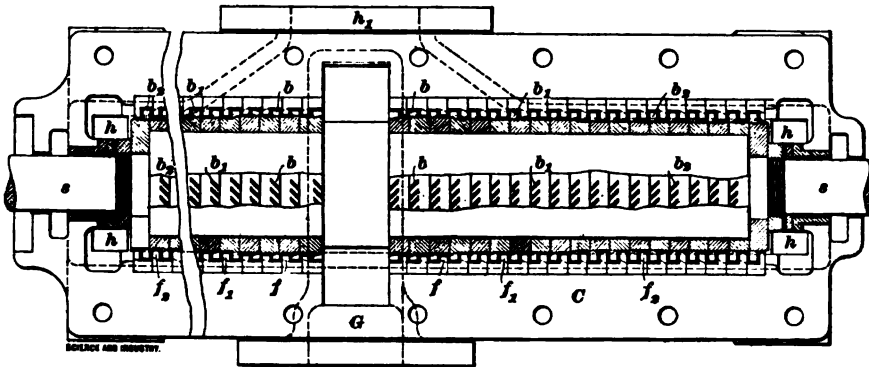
SECTIONAL VIEW OF PARSONS TURBINE
